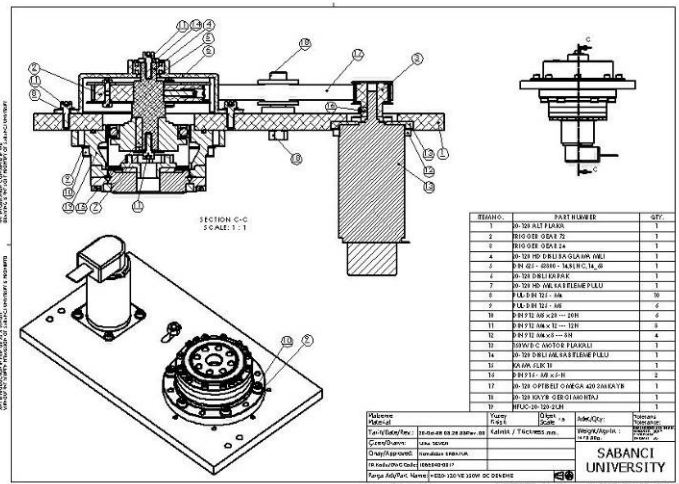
150 W Maxon DC motor and HFUC 20 series Harmonic Drive setup technical drawing
